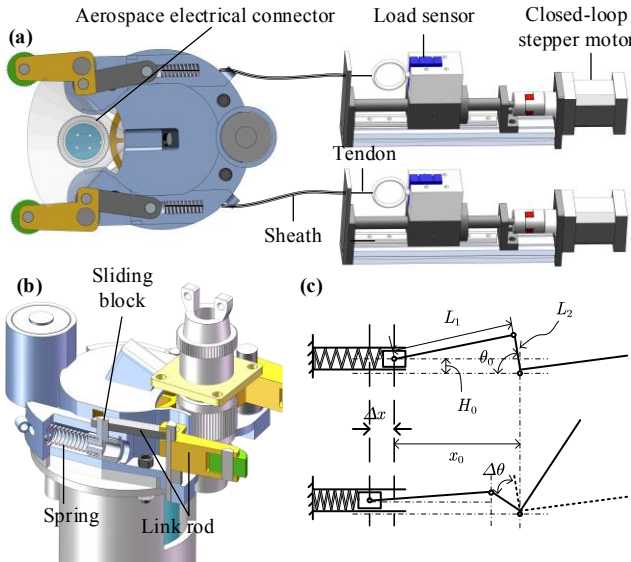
The design and principle of the clamping mechanism: (a) The driving mode of the clamping device; (b) A three-dimensional sectional view of the clamping mechanism; (c) A schematic representation depicting the operational principle of the clamping mechanism.
